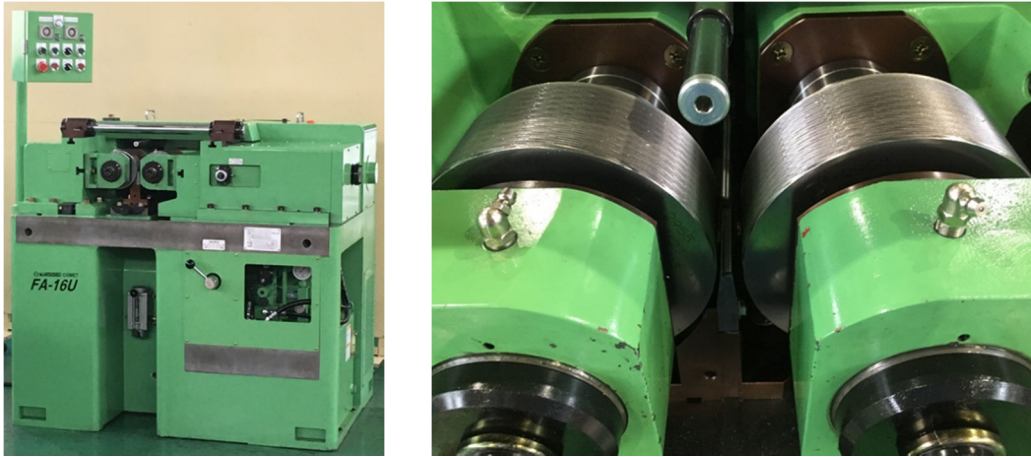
Thread rolling machine of 2 roller-dies plunge feed type
